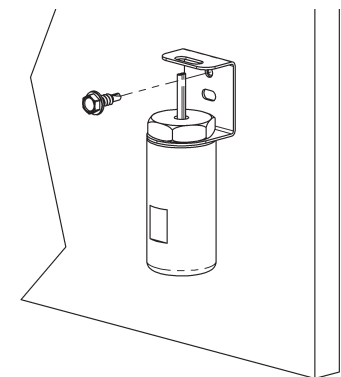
1" Hanging Bracket Wall Installation (Transmitter Mounted Externally)
